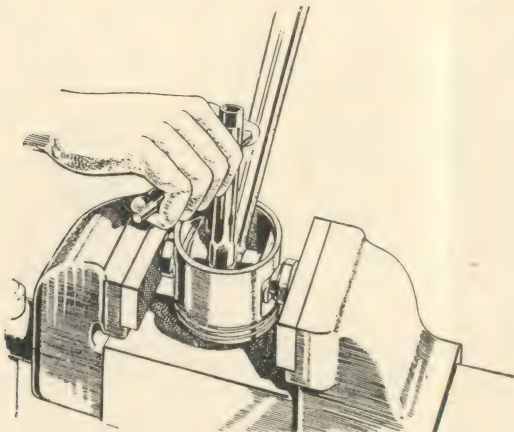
REMOVING THE MORRIS GUDGEON PIN
